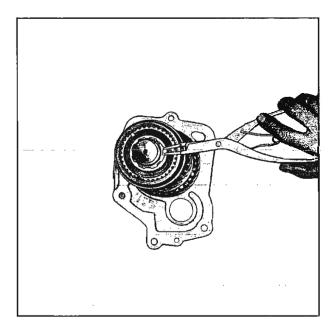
A-20 Removing or Replacing Mainshaft Front Snap Ring
